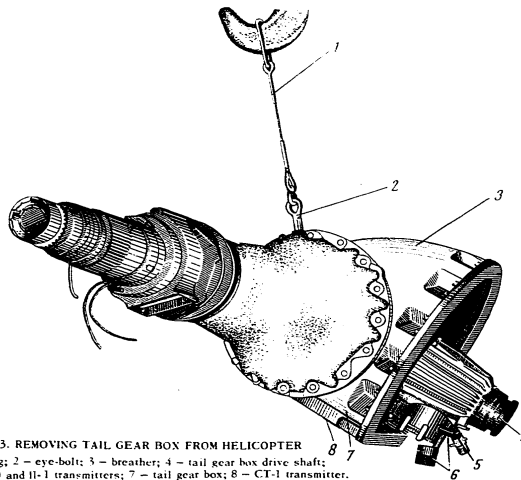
REMOVING TAIL GEAR BOX FROM HELICOPTER
